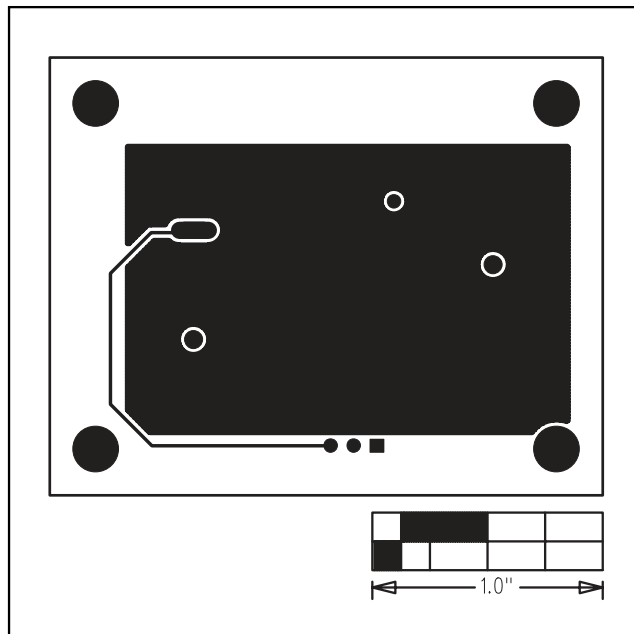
MAX9509 EV Kit PCB Layout—Solder Side
